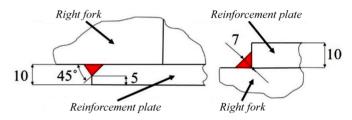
Geometry and position of welded joints between the reinforcement plate and the fork (in mm).
